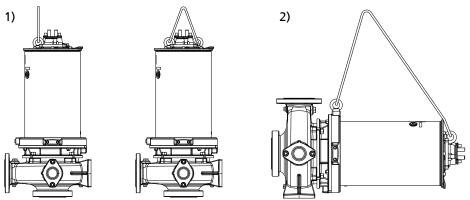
Transporting the pump set 1) Vertical installation [K and D] 2) Horizontal installation [H]
